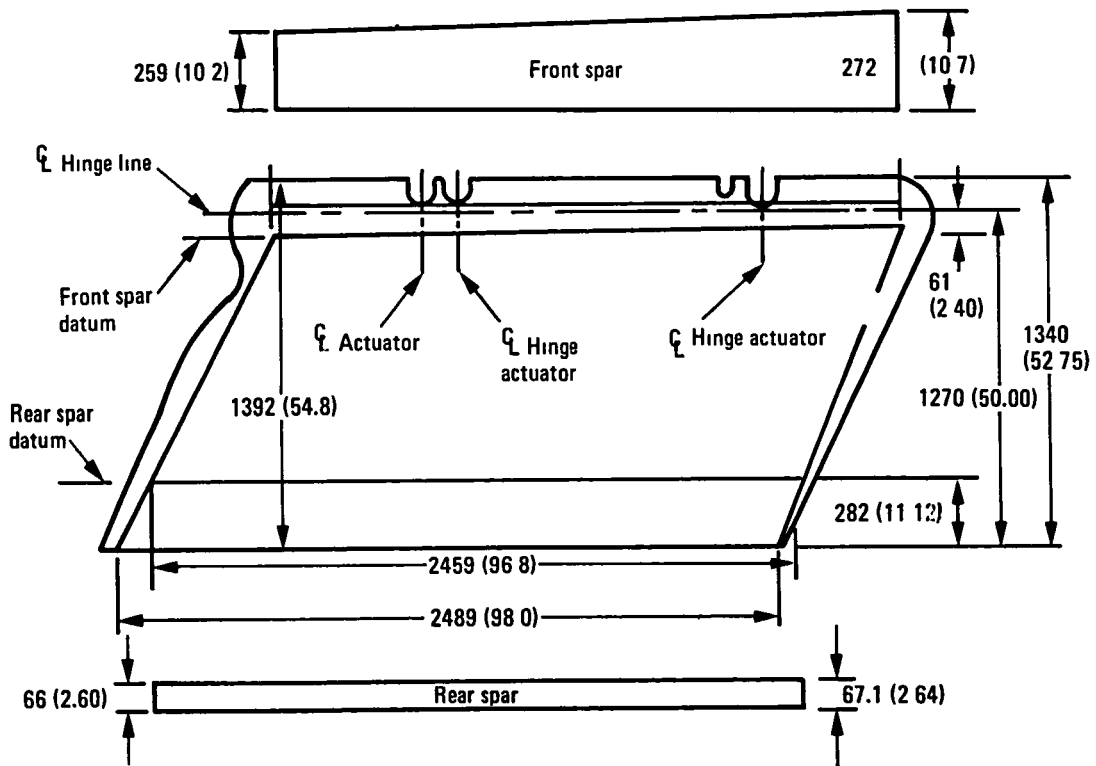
Inboard aileron dimensions (All dimensions shown in mm (in))
